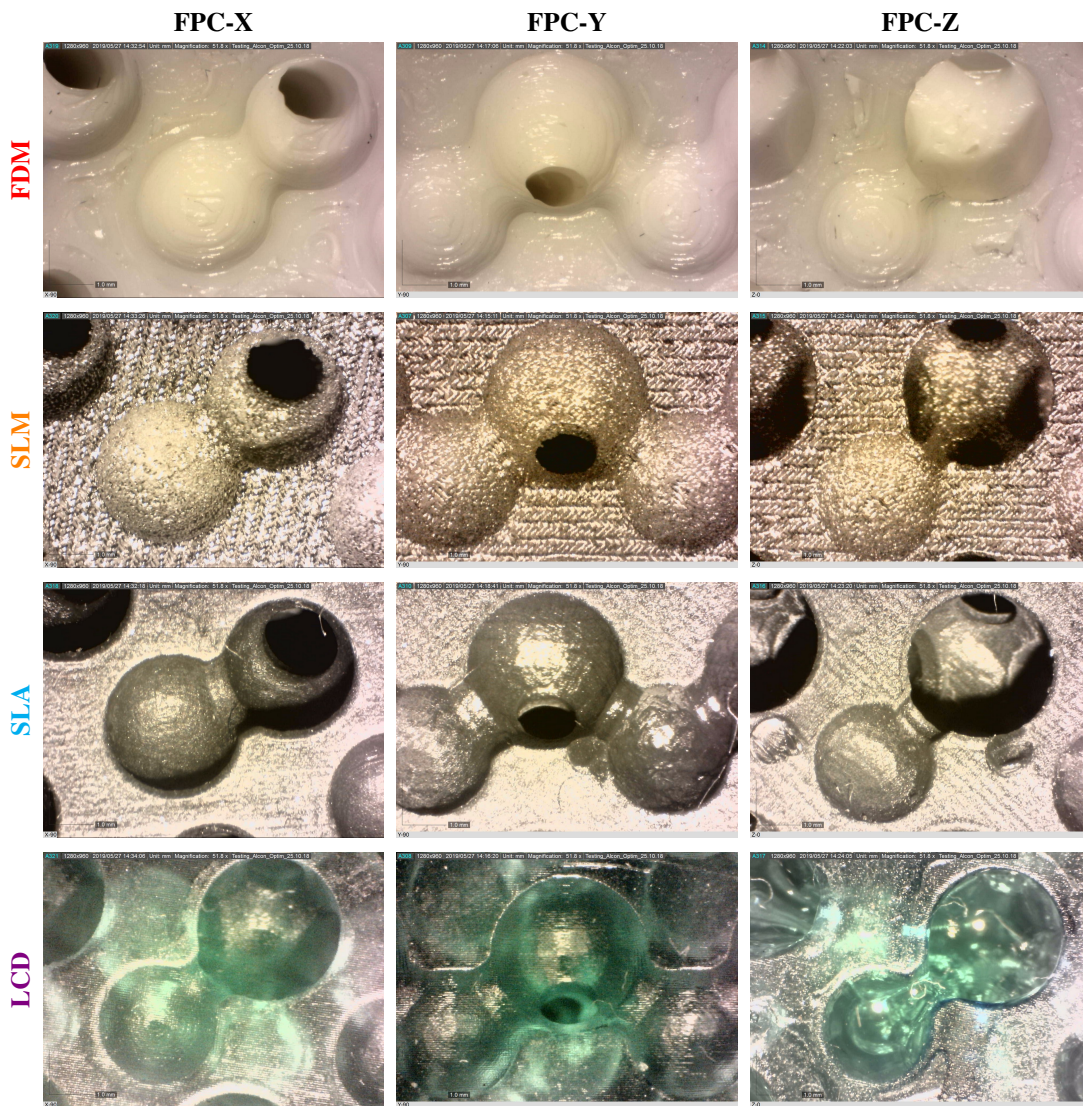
Zoomed surfaces of FPC samples manufactured by TCD
